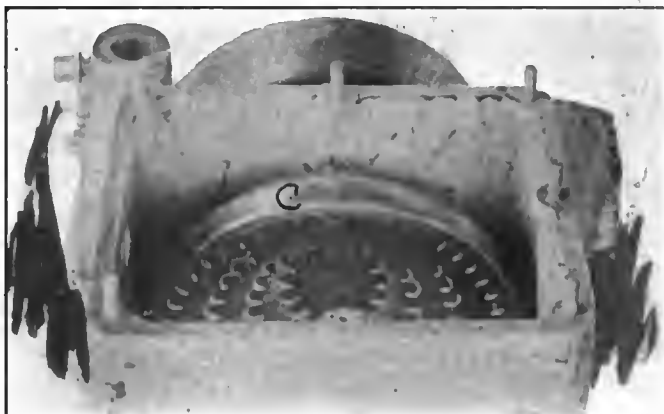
Front view of the driven member, showing the four internal tooth rings which mesh with the driving pinion
